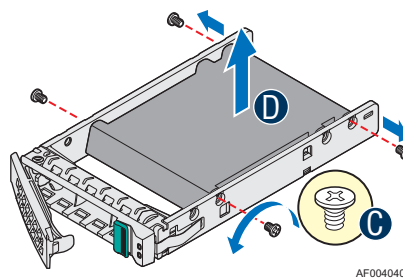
2.5" HDD or SSD Assembly – Removing the Drive Blank
